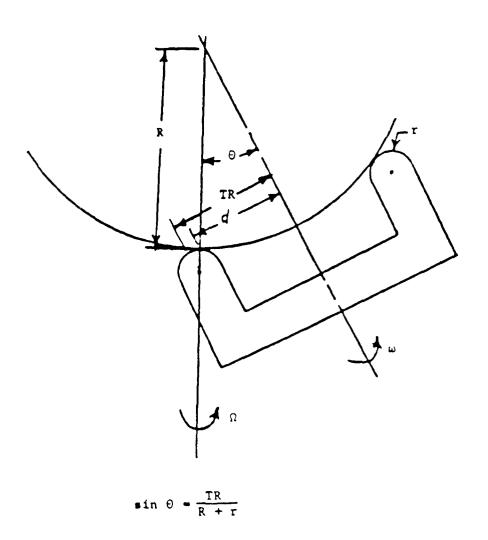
Ring Tool Generation Geometry - Sphere.
